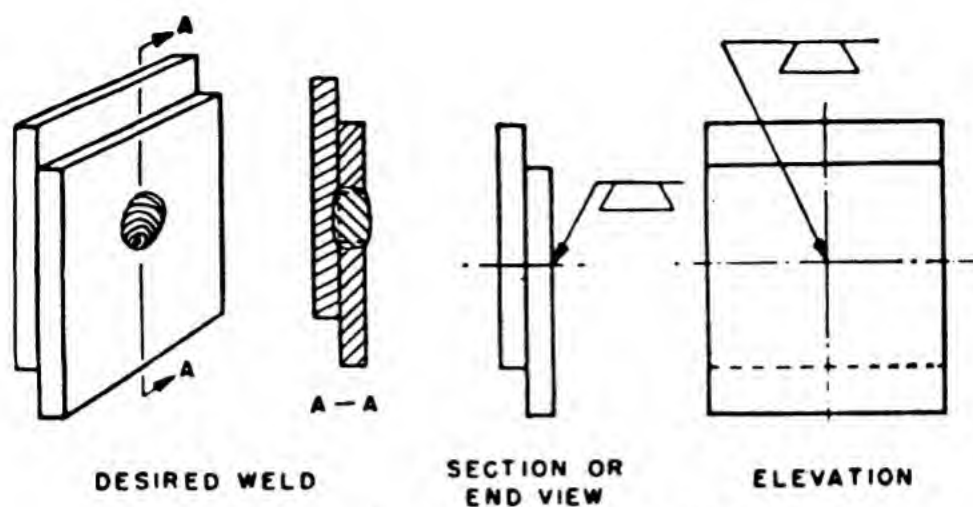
Use of arrow-side plug welding symbol.
